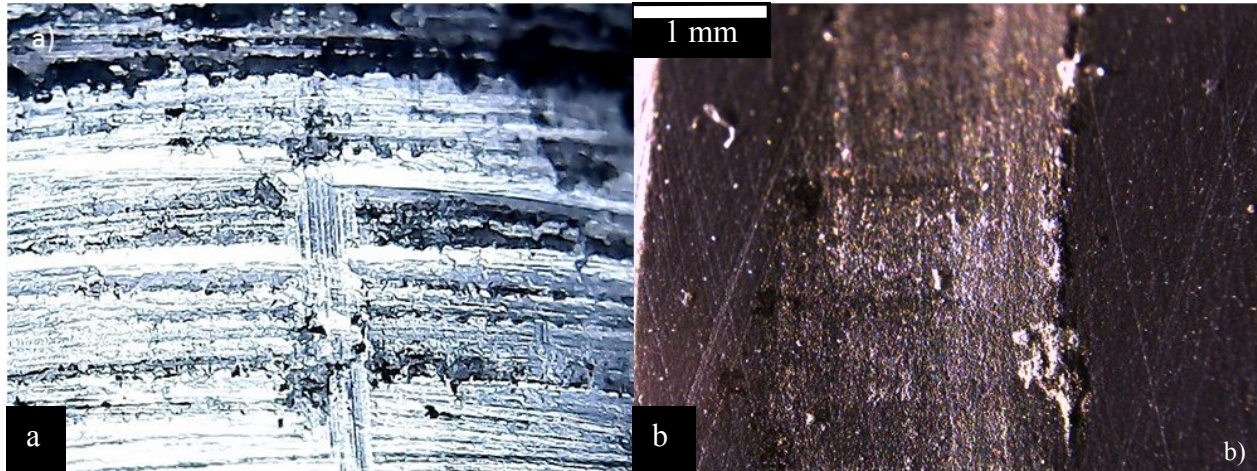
a) Hub erosion due to fretting and adhesion between the hub and bearing race. Features in this figure are in the mm scale. b) Aluminum material transfer to the inner bearing surface. The scale shown in the top left corner reads 1 mm.
